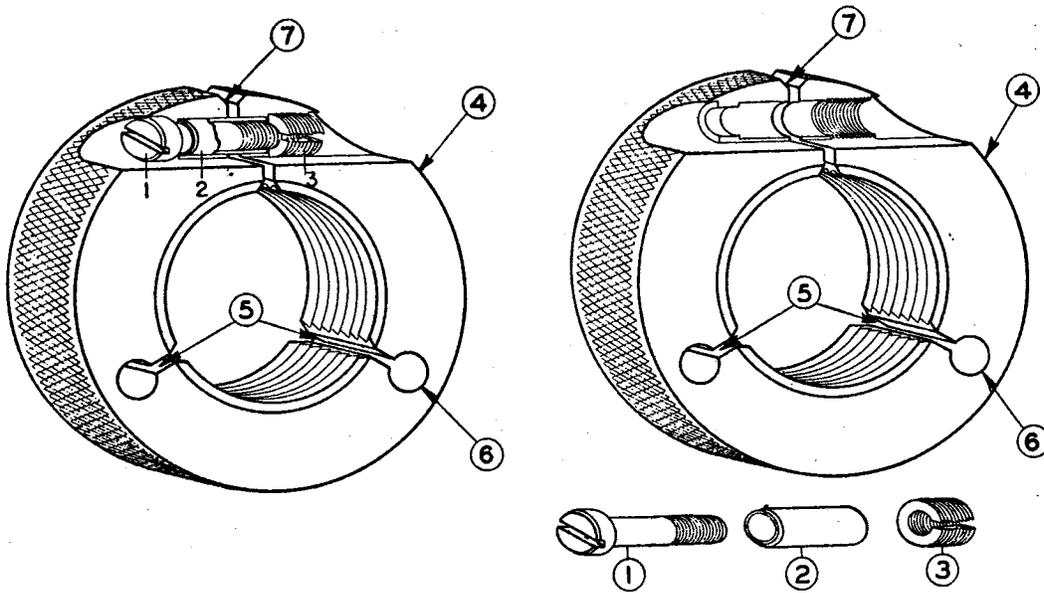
Thread ring gage locking device, details of construction, range No. 0 to 5½ inches, inclusive.
